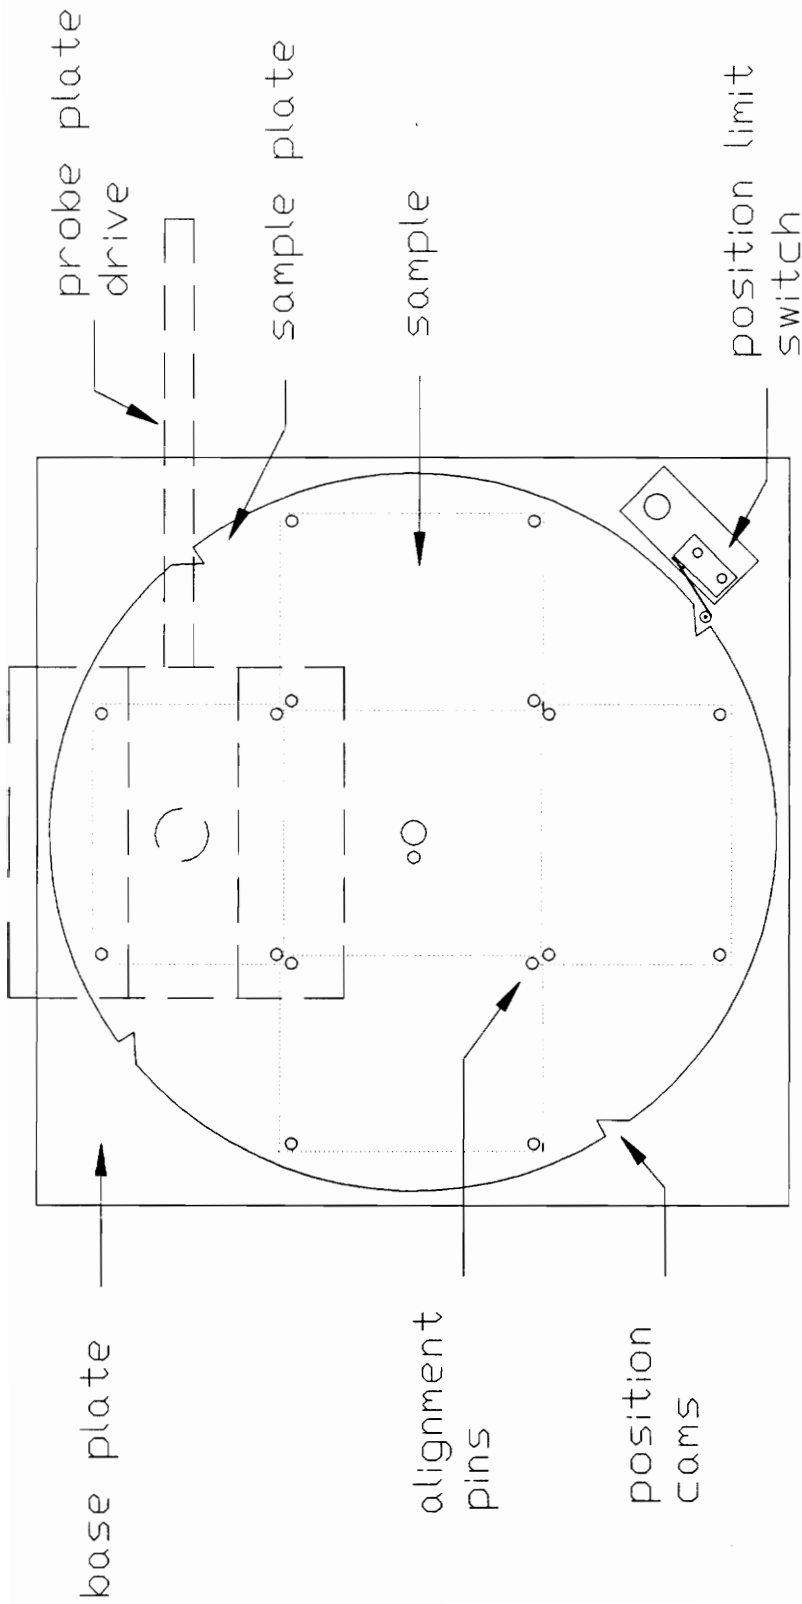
Test Fixture - Sample Changer (Top View)
